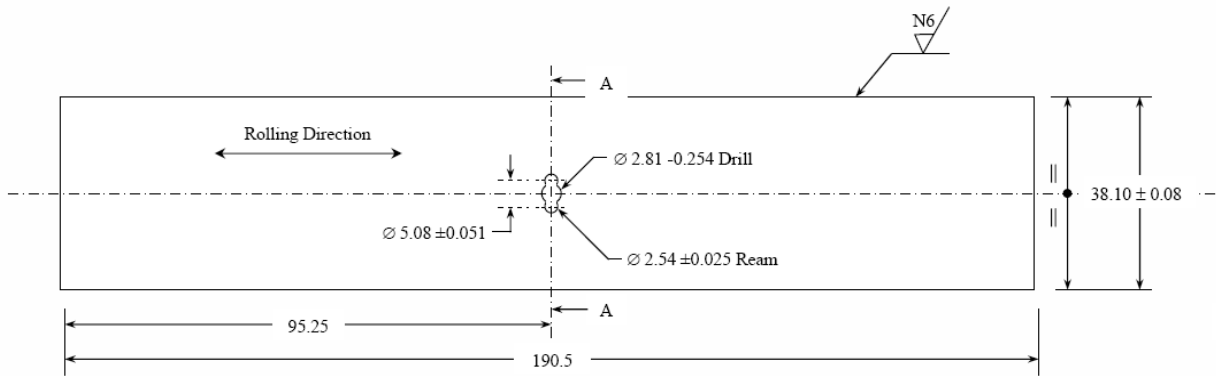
Geometry of $K_t = 5.0$ fatigue specimen [30]. Dimensions are in mm
